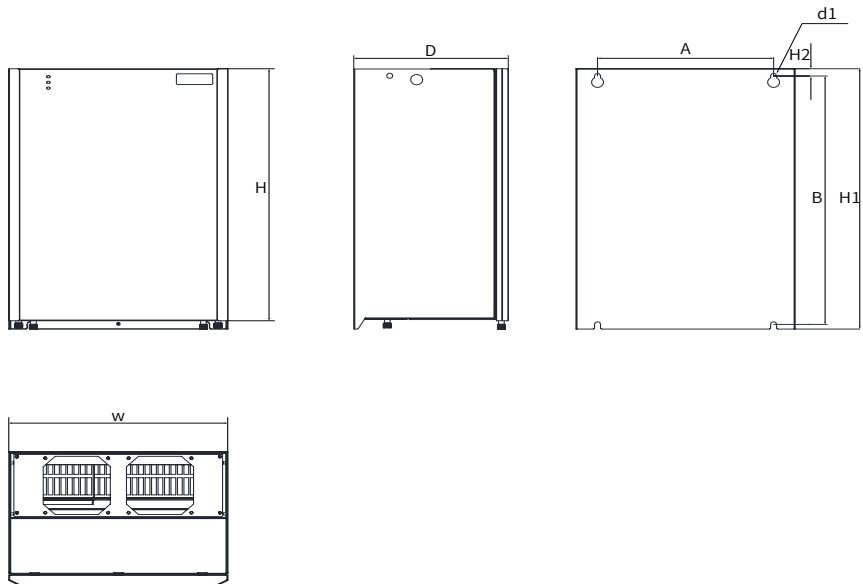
Dimensions of backplate mounting for CP700-4T45-H1-INT to CP700-4T90-H1-INT models
